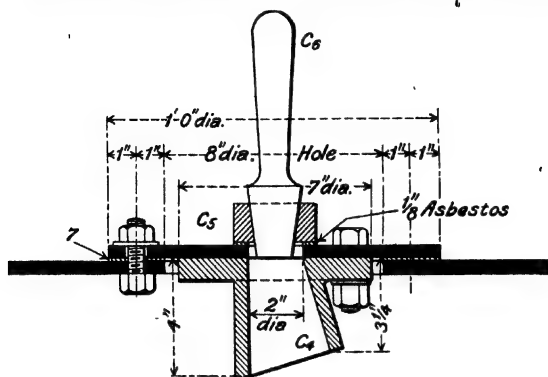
DETAIL OF PLUG POKING HOLE.
